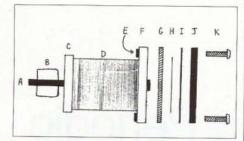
Magnetic headphone assembly (see Parts list for key).
